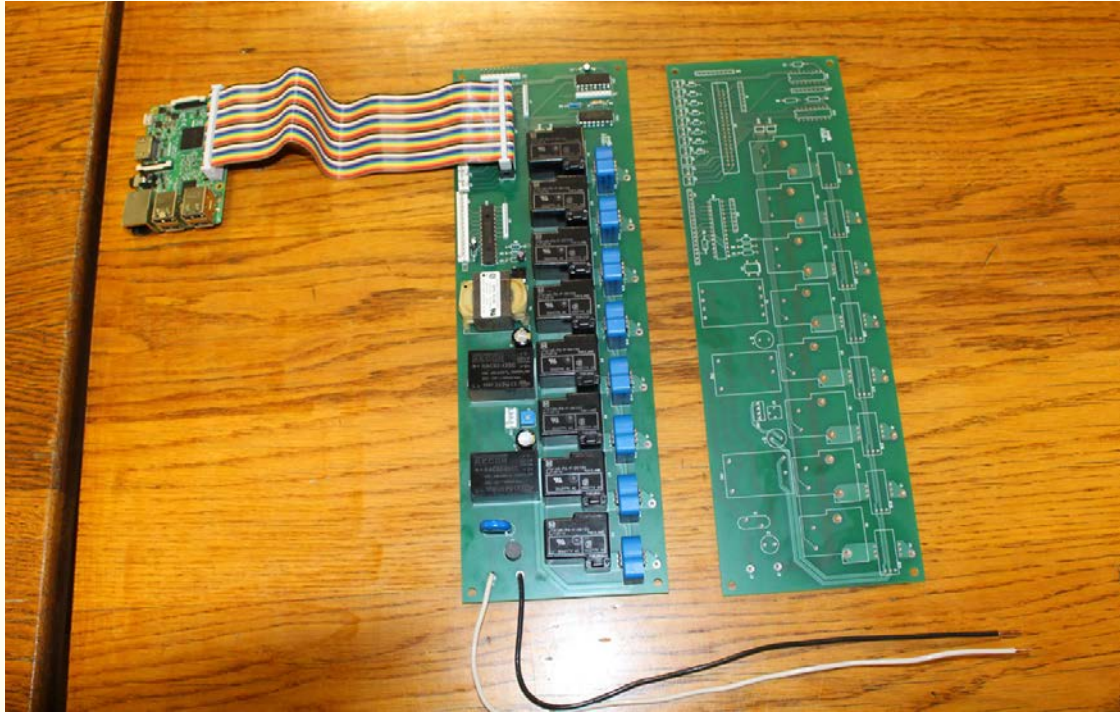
Empty PCB Board pictured next to the assembled circuit board with microcontroller.
